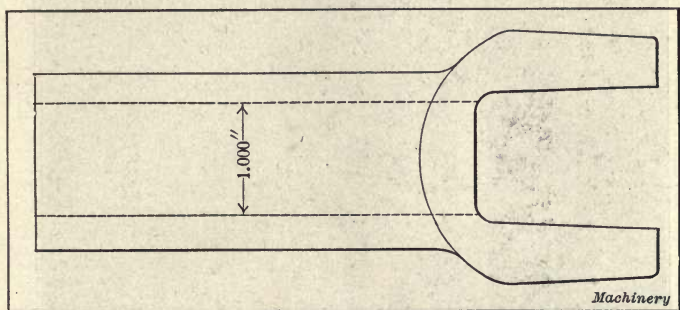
Slip-hub in which the Round Hole is finished by broaching
